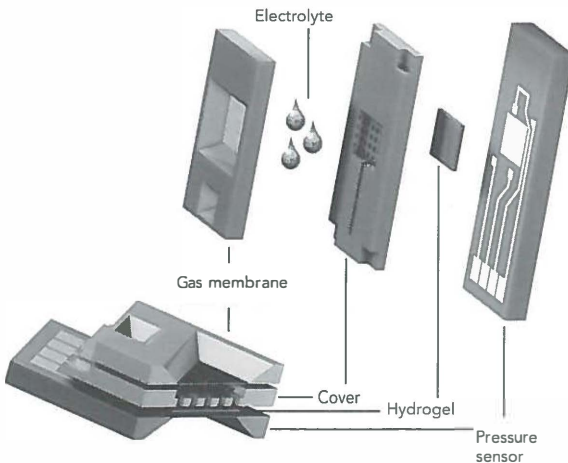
Exploded view of all parts and assembly drawing of the final hydrogel-based CO₂ sensor.
